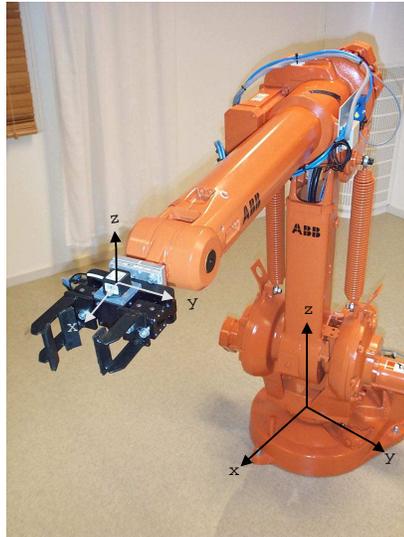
An ABB IRB1400 robot with a 3-axes accelerometer mounted on top of the gripper.
